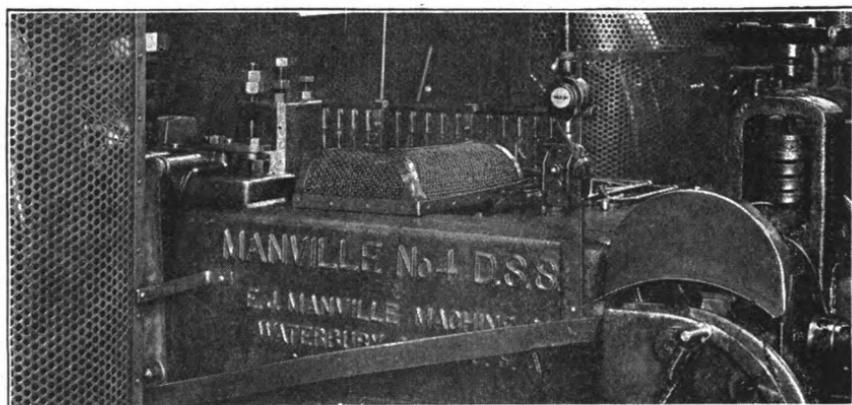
Cold header with screen guard at top to stop flying pieces. Flywheel (at left) and gears (at right) also guarded. (Rule 153)
